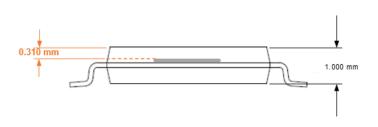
XtremeSense TMR Sensor Location in z Dimension for CT310 in TSSOP-8 Package
